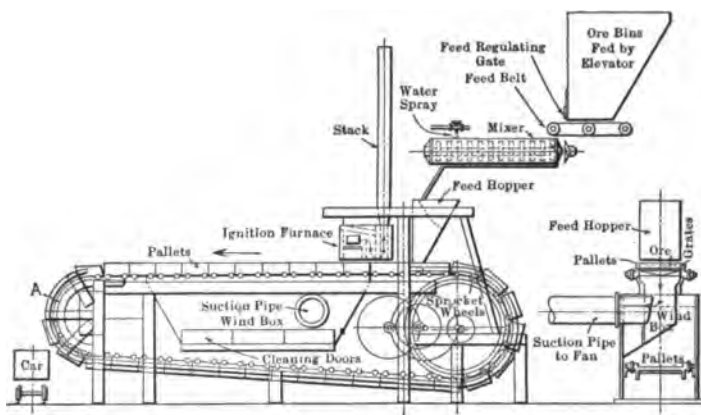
Dwight-Lloyd Straight-line Lead Ore Sintering Machine.
